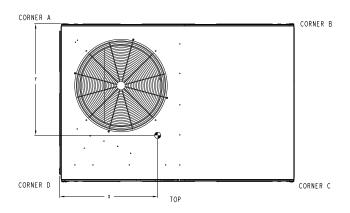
Unit Dimensional Drawing - 12 Size Unit
